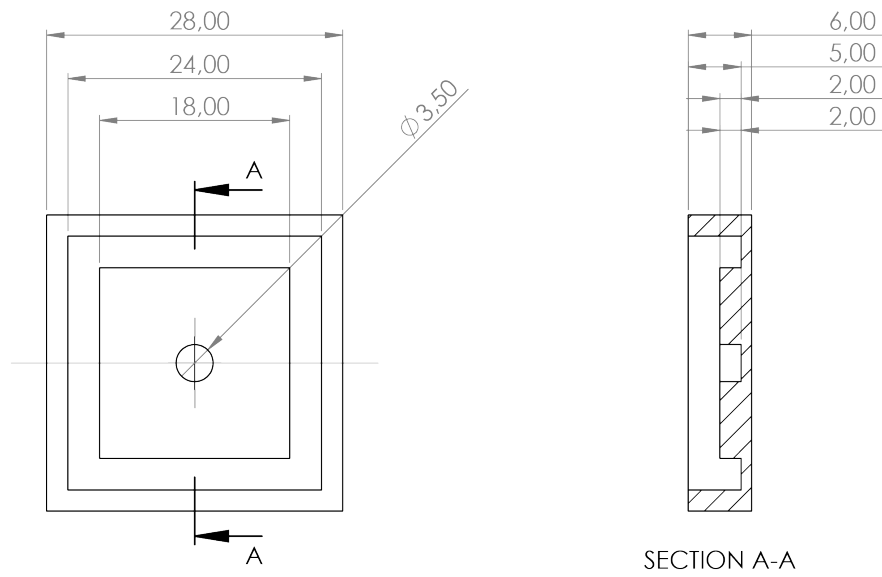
Drawing of the square mould used for the fabrication of the PDMS moulds. Dimensions are in millimeters (mm).
